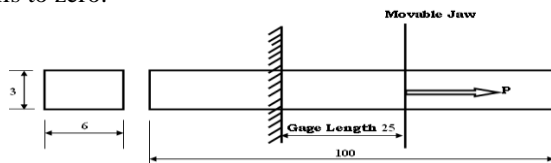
Tensile test specimen geometry as per ASTM C1275 standards Fig.8 Tensile test specimens
